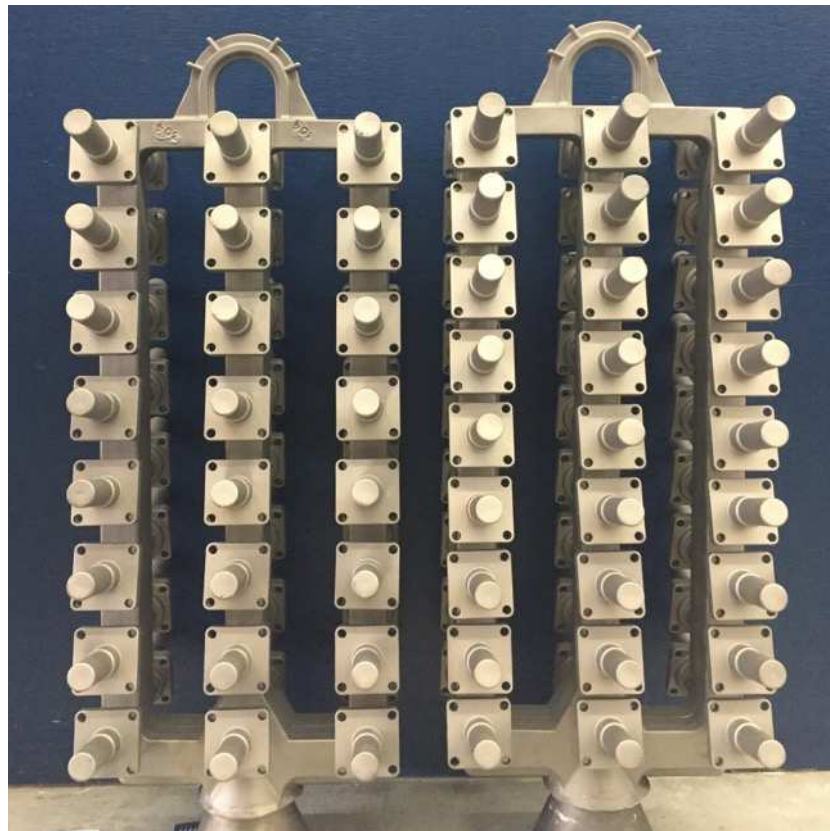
Part #1, 8 and 9 parts per weld casting examples
